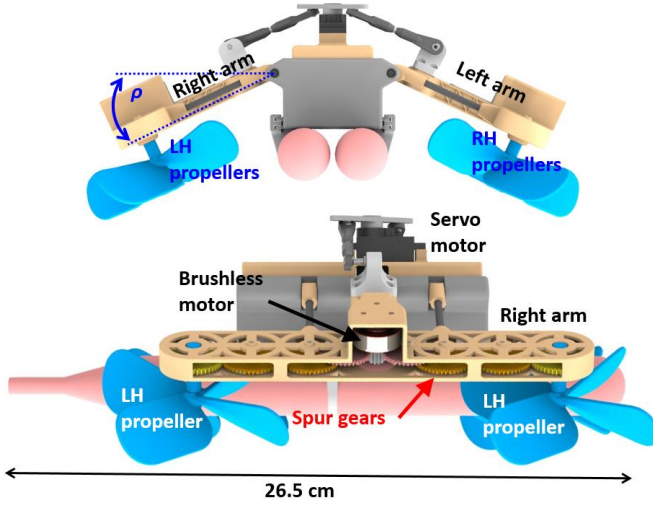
The sprawl mechanism, actuated using a servo motor, has a range of 25 degrees. The torque of the motors is transferred to each propeller using 4 consecutive gears with a gear reduction ratio of 1:16.7. Right hand propellers are attached to the left arm and left hand propellers to the left arm.
